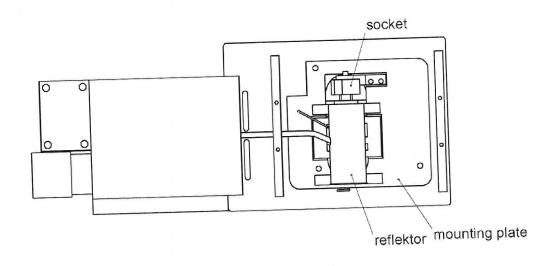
Heating Plate FA 6, with optional vacuum holder
